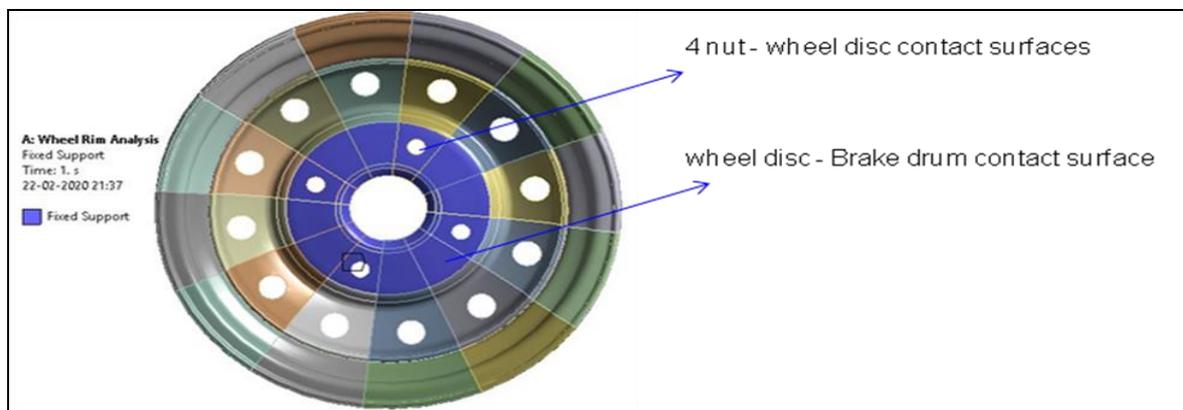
Fixed Support – 4 nut –wheel disc contact surfaces and wheel disc - Brake drum contact surfaces
